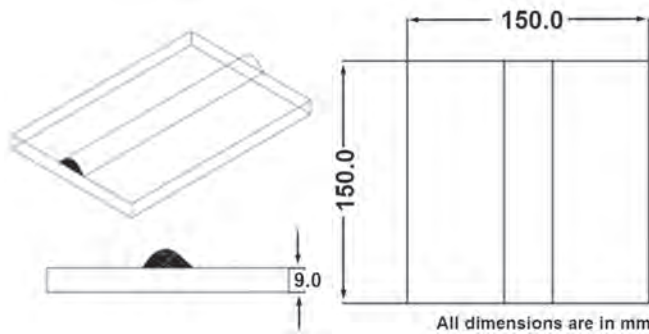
Dimension of base plates used for preparing bead on plates.
